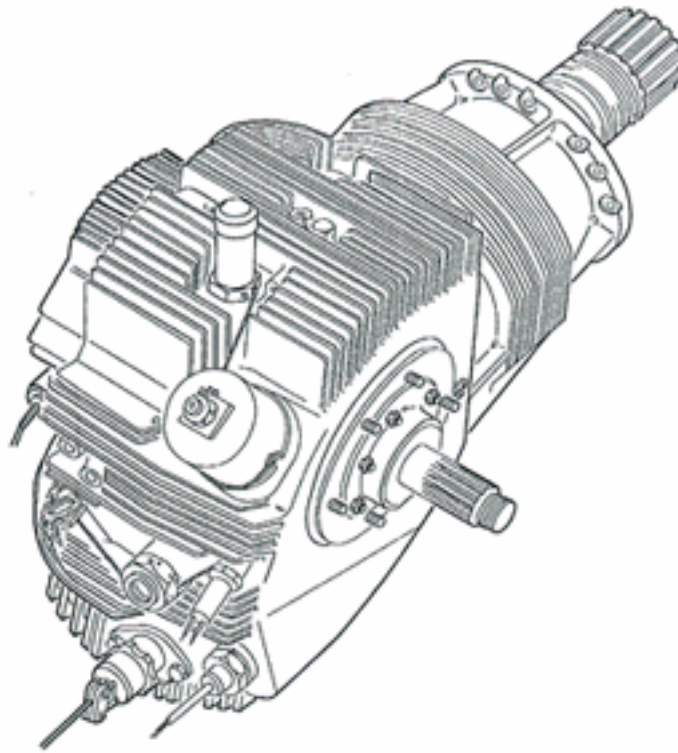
Nose Gearbox Assembly, Right (AH-64A/D)
